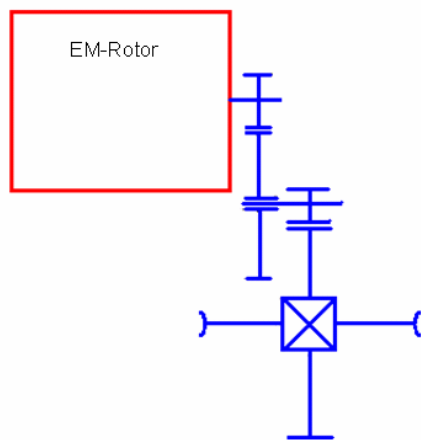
Gearbox pattern of a single speed spur gearbox with parallel layout
